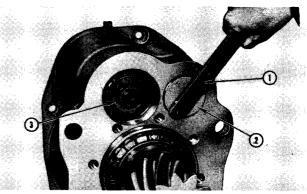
LOCKNUTS AND SETSCREWS IN POSITION
